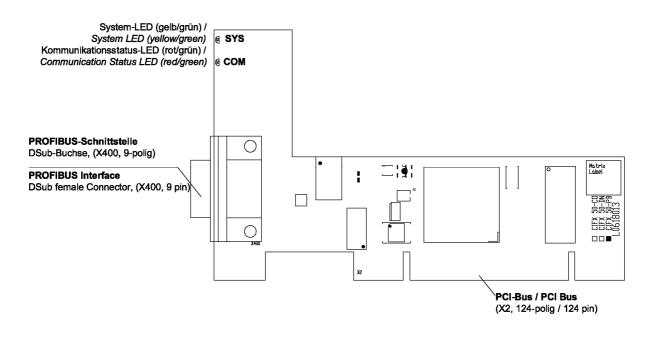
Device Drawing CIFX 50-DP (hardware revision 4)
